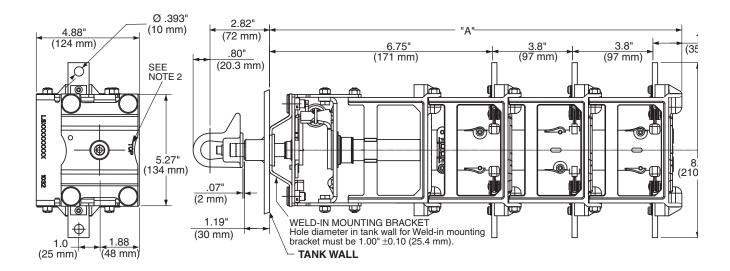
Line Illustration with dimensions of loadbreak switch with "Weld-in System" for horizontal or vertical mounting.
